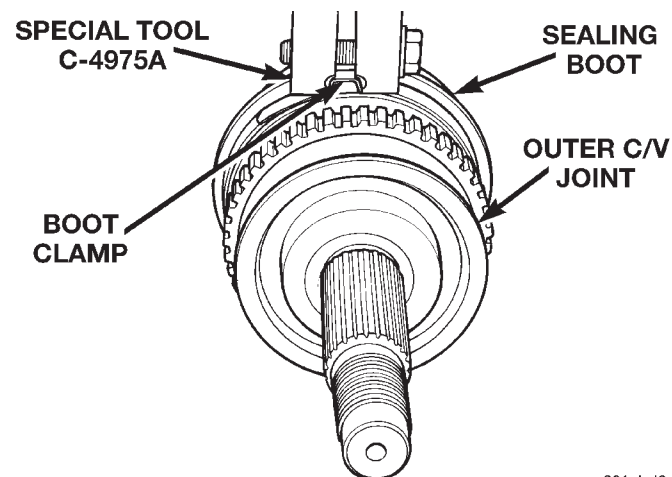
Crimping Tool Installed On Large Boot Clamp PINION SHAFT SEAL
